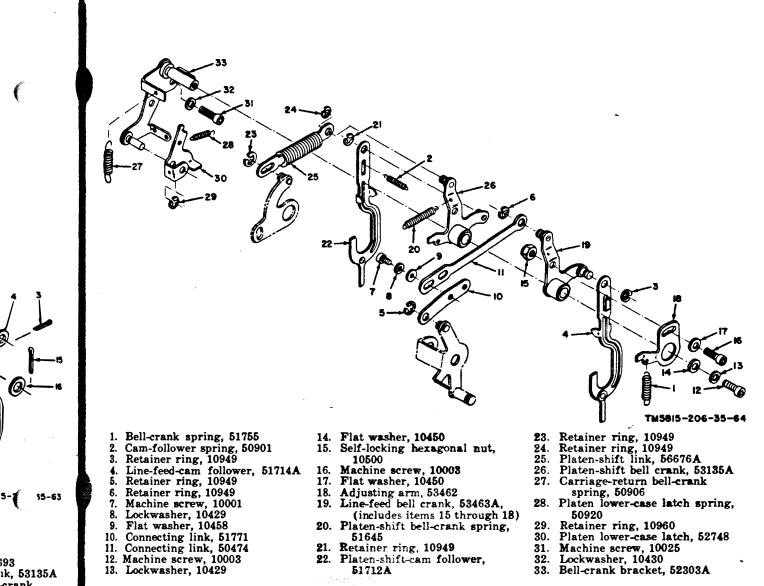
Line-feed and platen-shift mechanisms (TT-4B/TG), exploded view.
